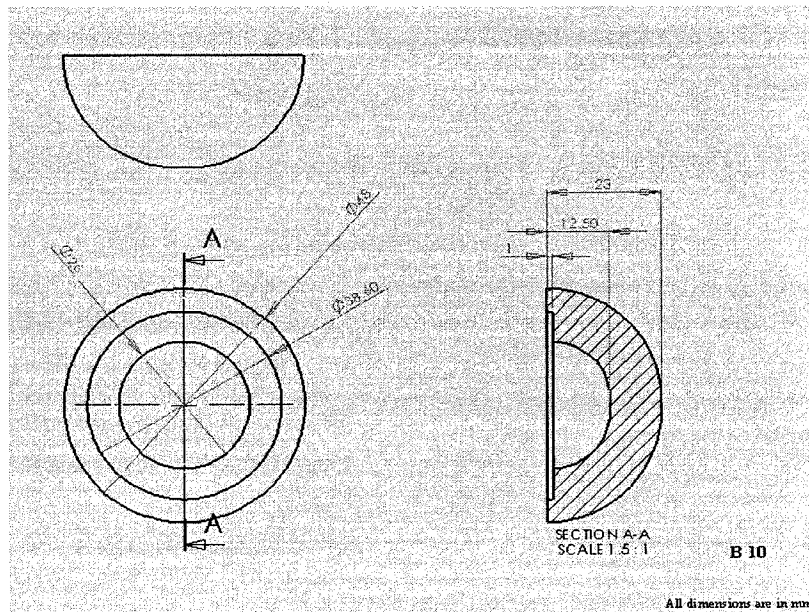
Mechanical drawings of the hemispherical Boron 10 dome.
